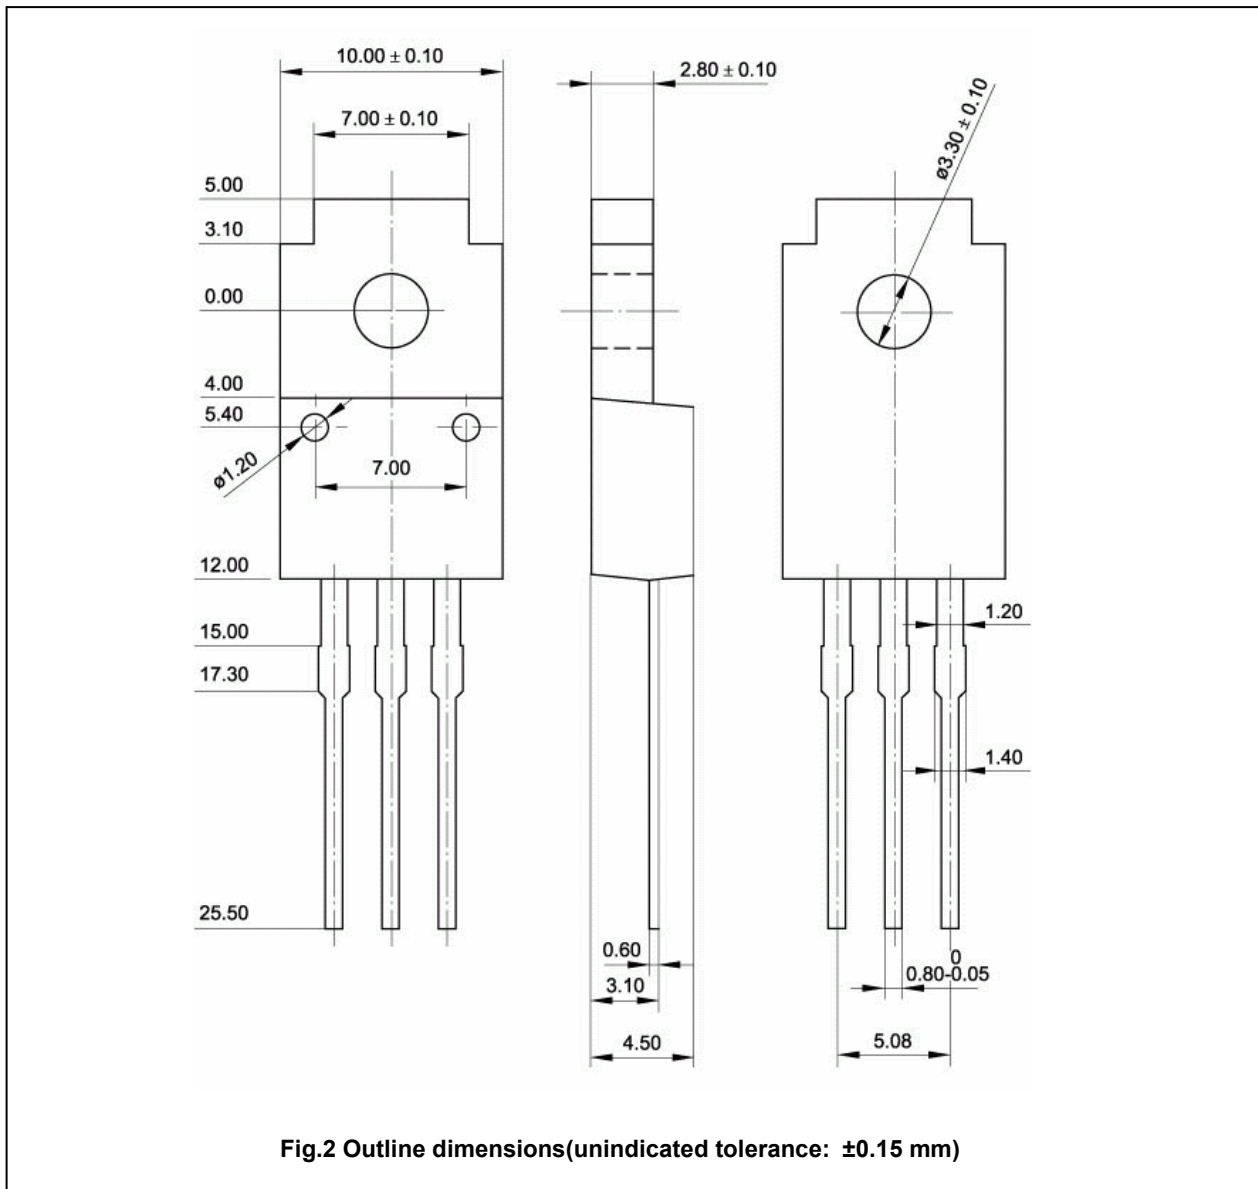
Outline dimensions(unindicated tolerance: ± 0.15 mm)
